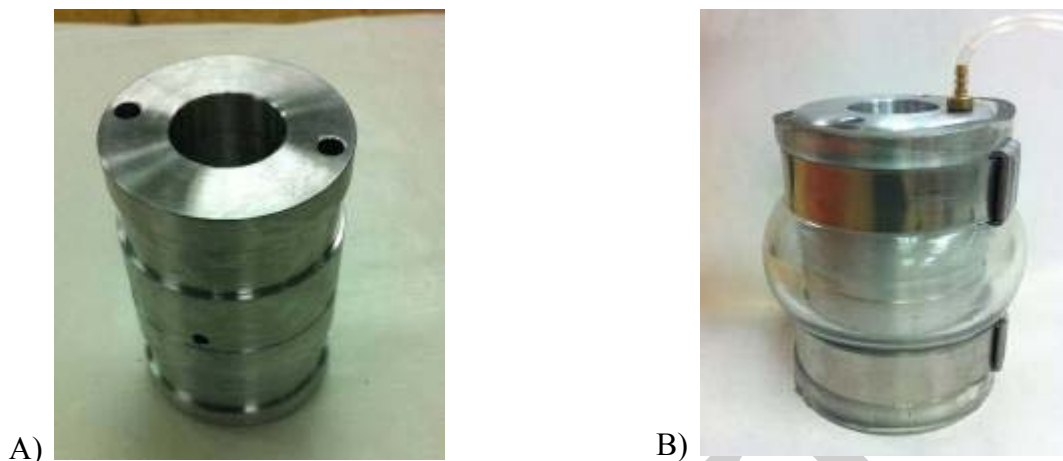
A) Rim showing grooves for clamps, B) front rim assemble and pressurized.
